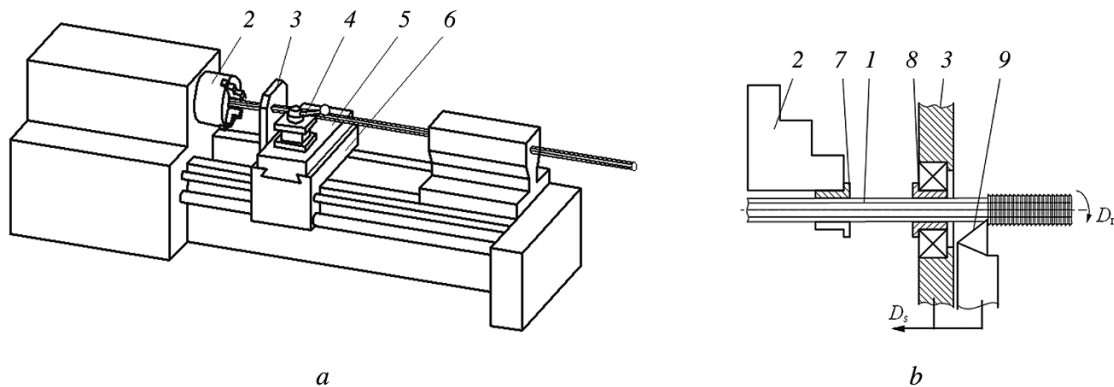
Making of through slits in the longitudinal corrugated tube on a lathe: *a*) general layout; *b*) diagram of processing.
